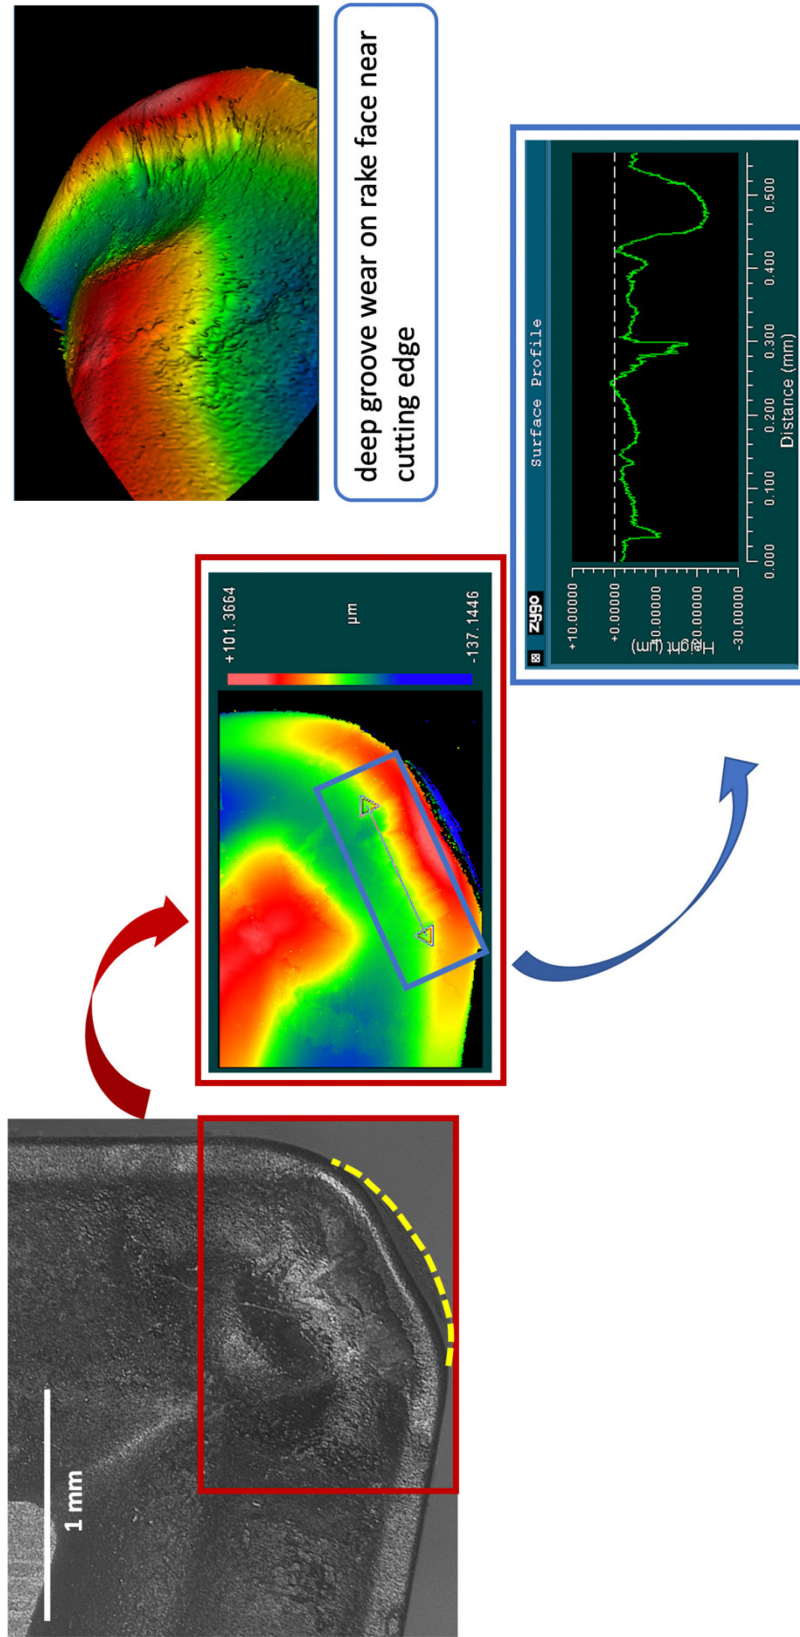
Left: Zygo image of rake face (insert 3D). Upper right: zoom-in of BUE on cutting edge of tool. Lower right: surface profile of BUE to quantify height.
